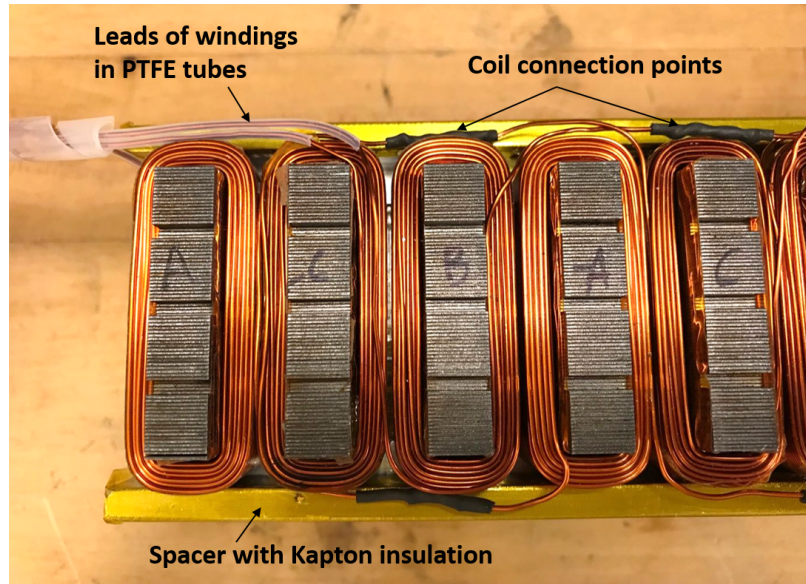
Photograph of motor stator assembled to the stator backiron and spacers.
